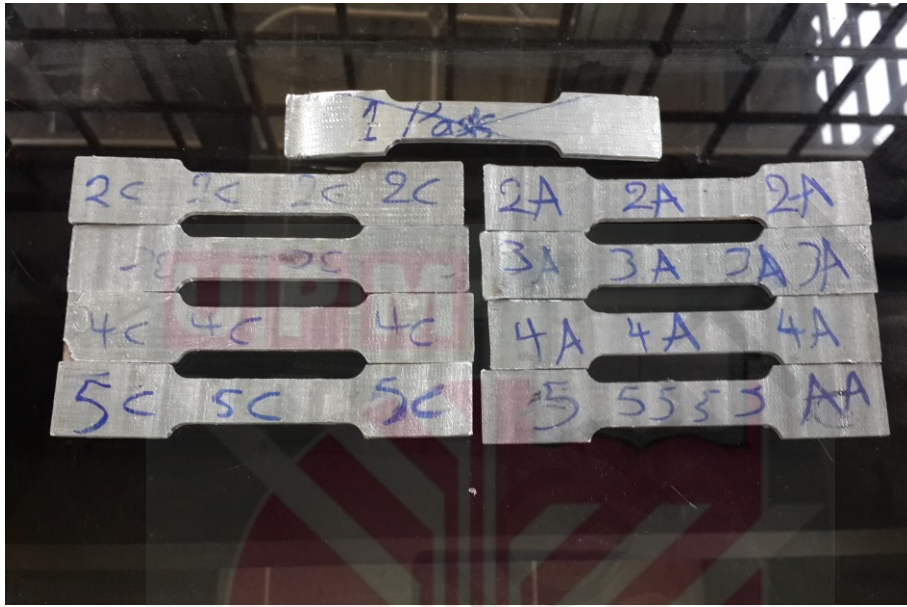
Dumbbell form specimens for uniaxial tensile testing
